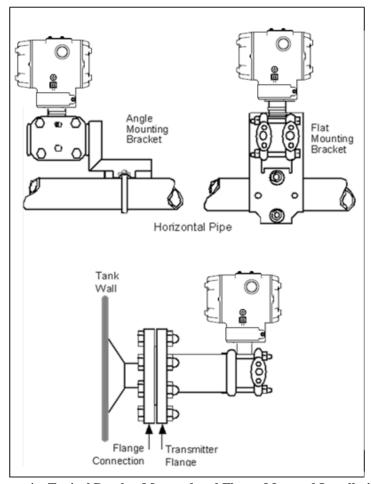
Typical Bracket Mounted and Flange Mounted Installations
